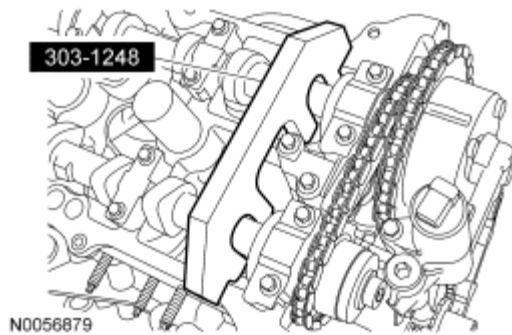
Installing Special Tool (303-1248) Onto Flats Of RH Camshafts
